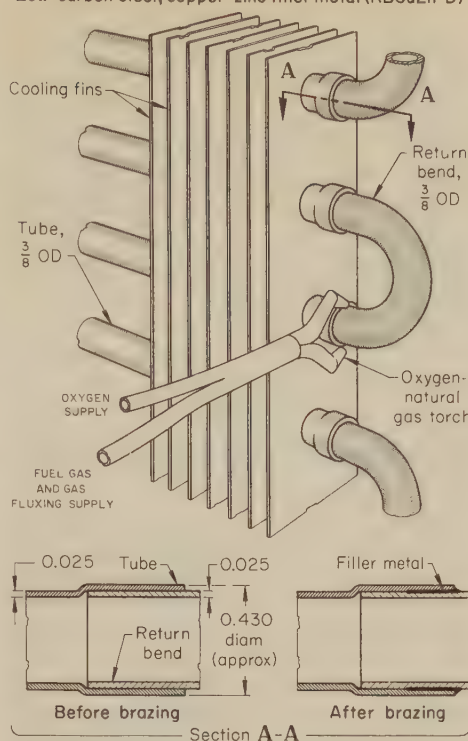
Portion of an oil cooler showing the method used for brazing return-bend joints. Copper-zinc alloy filler metal with gas fluxing proved less costly than silver alloy filler metal with liquid flux. (Example 583)
